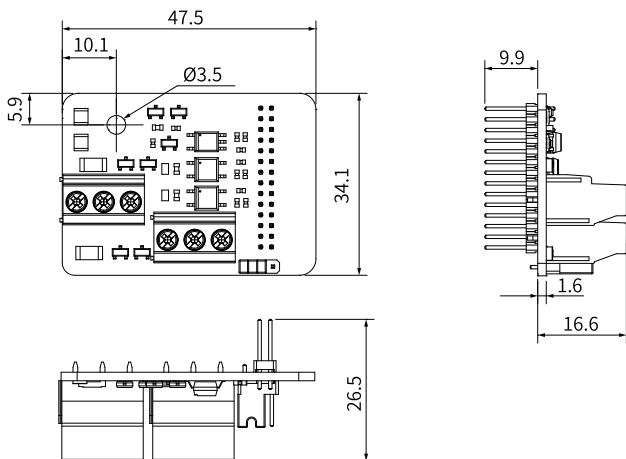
MD38IO2 card dimensions (unit: mm)
